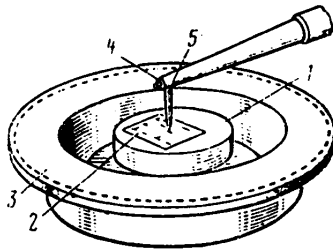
The assembly for the placement of chips in the EM-431 unit.
